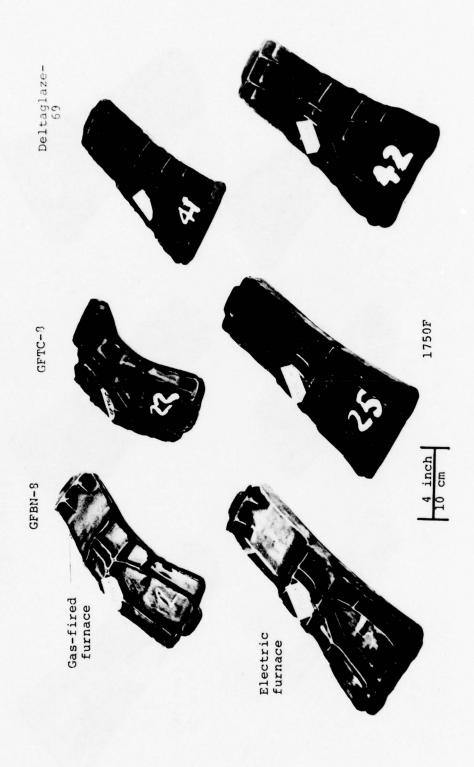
Closeup view of structural component forgings produced by isothermal forging at 1750F using three different lubricants
